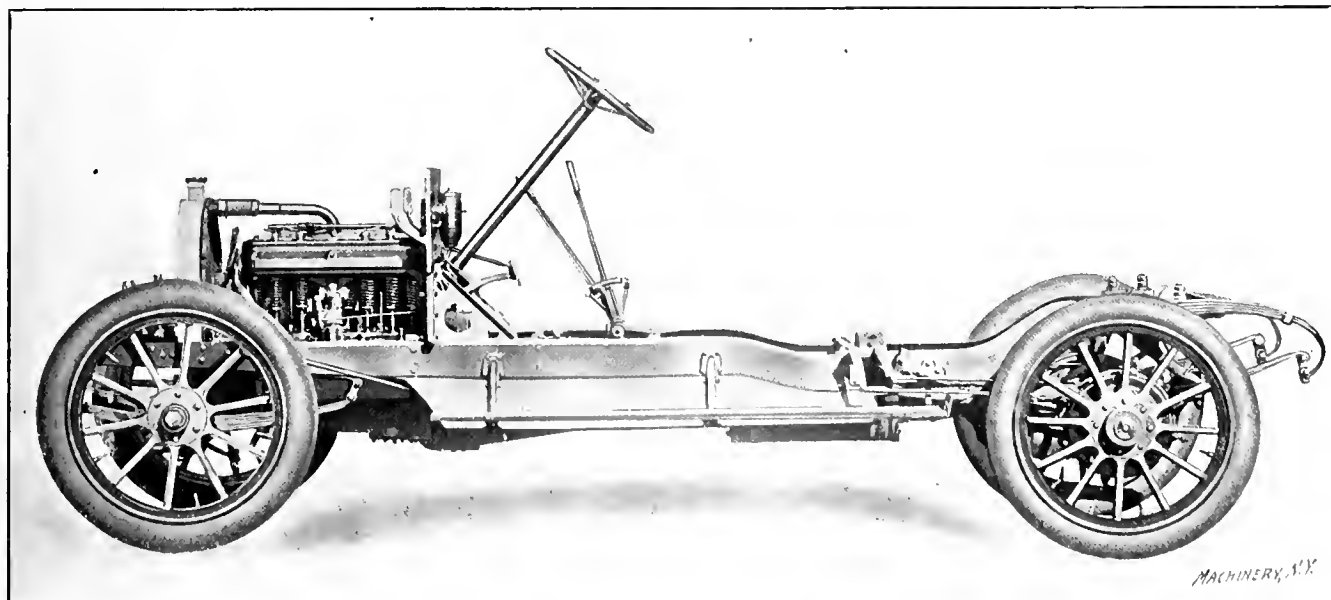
Chassis of an F. B. Stearns Motor Car, showing Three-quarter Elliptic Spring Suspension in Rear and Semi-elliptic Springs in Front
